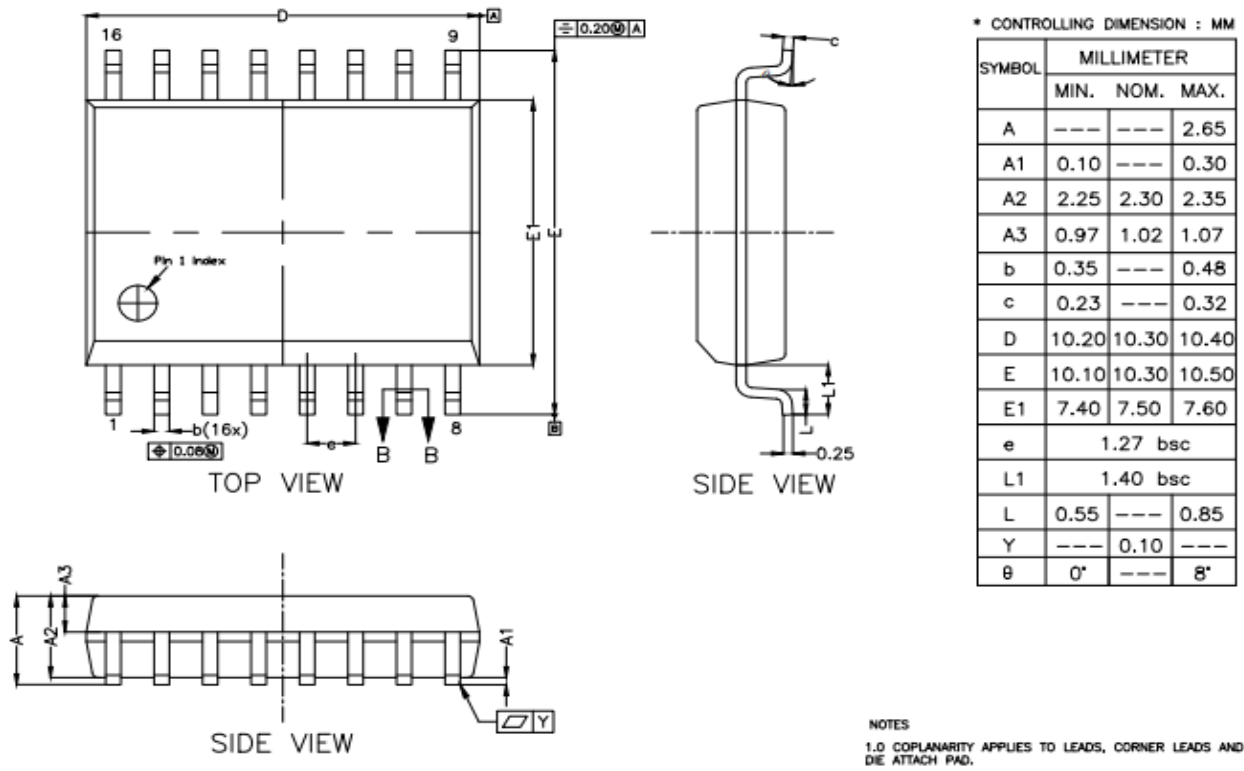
SOW16 Package Shape and Dimension in millimeters
